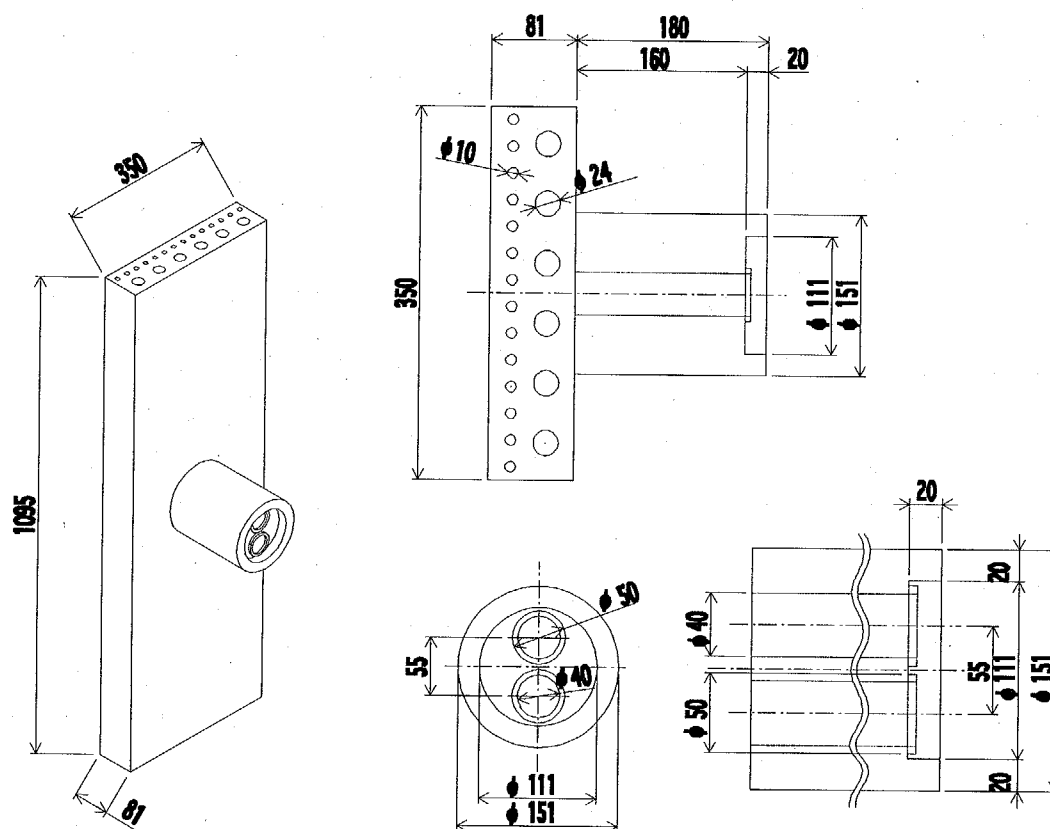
FW supporting beam (circular welding, beam length 180 mm)
